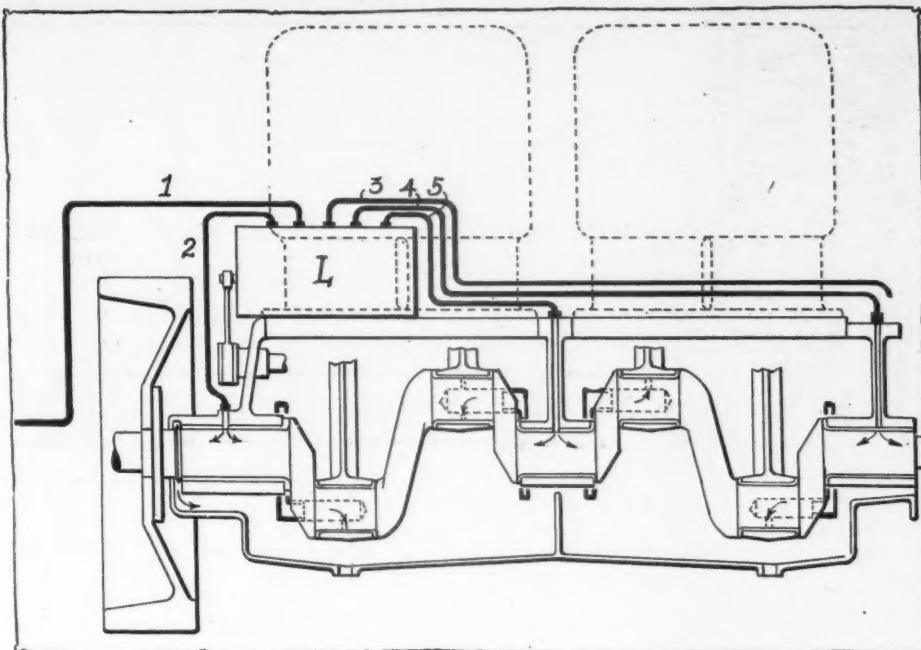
MECHANICAL LUBRICATOR SYSTEM ON PENNSYLVANIA MOTOR
